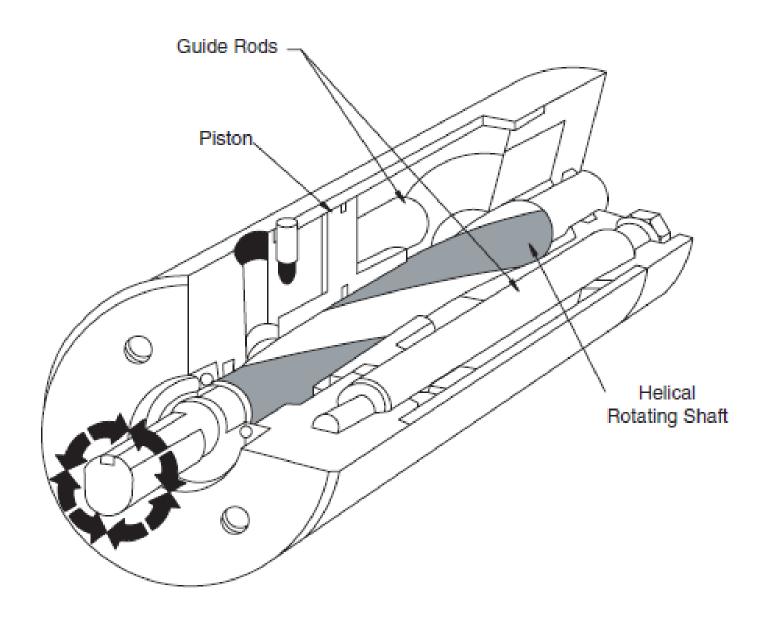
Limited-rotation actuator with helical shaft.
